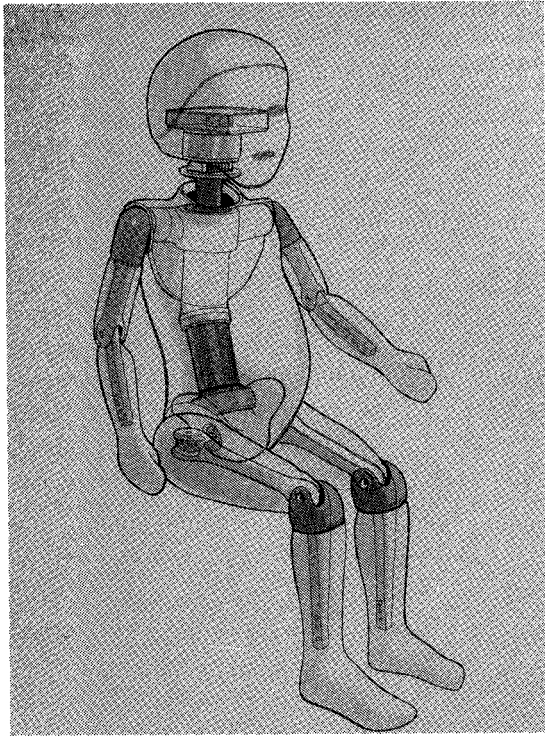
Design drawing of the TNO-P1½ in upright sitting position.
